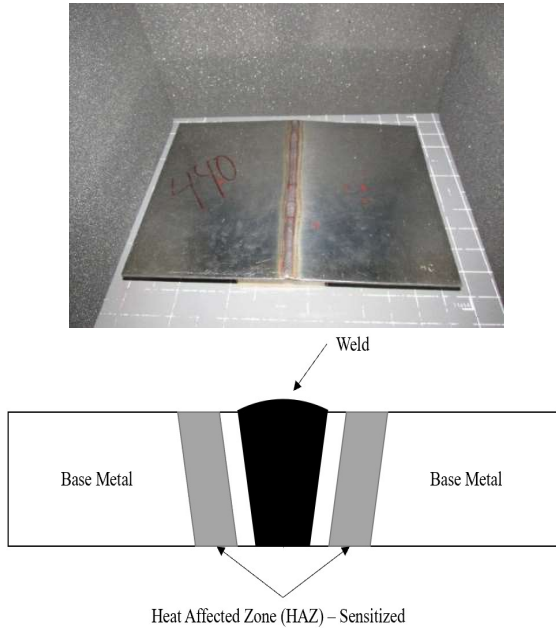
A WELDED 440C STEEL PLATE (TOP) AND A SCHEMATIC DRAWING OF WELD AND HAZ REGIONS (BOTTOM).
